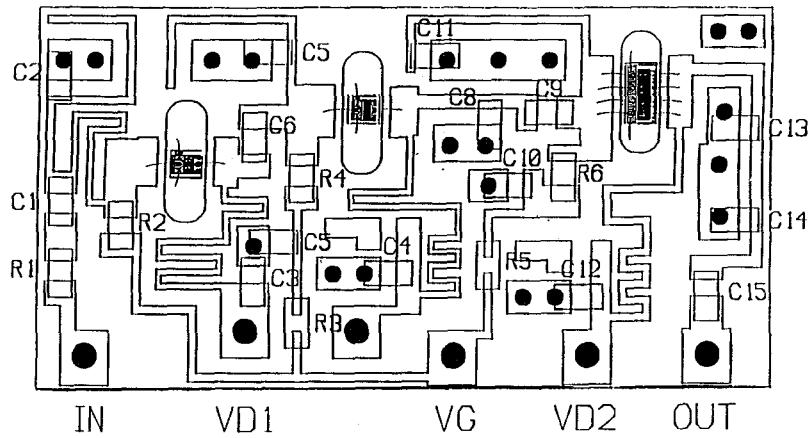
Layout for the surface mount module. (12mmX23mmX1.75mm)
